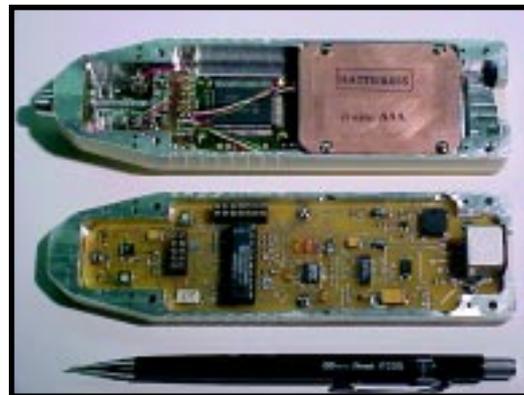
A design-for-manufacturing approach was taken for the construction of the aluminum-chassis prototype. The main two-sided PCB has ample room for parts, mainly because of the housing size needed to fit the AAA battery pack and LCD display.
